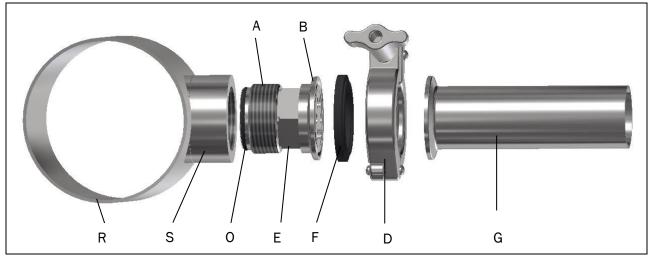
Installation of TANKO-RF with Thread PC on Thread Container Connector
